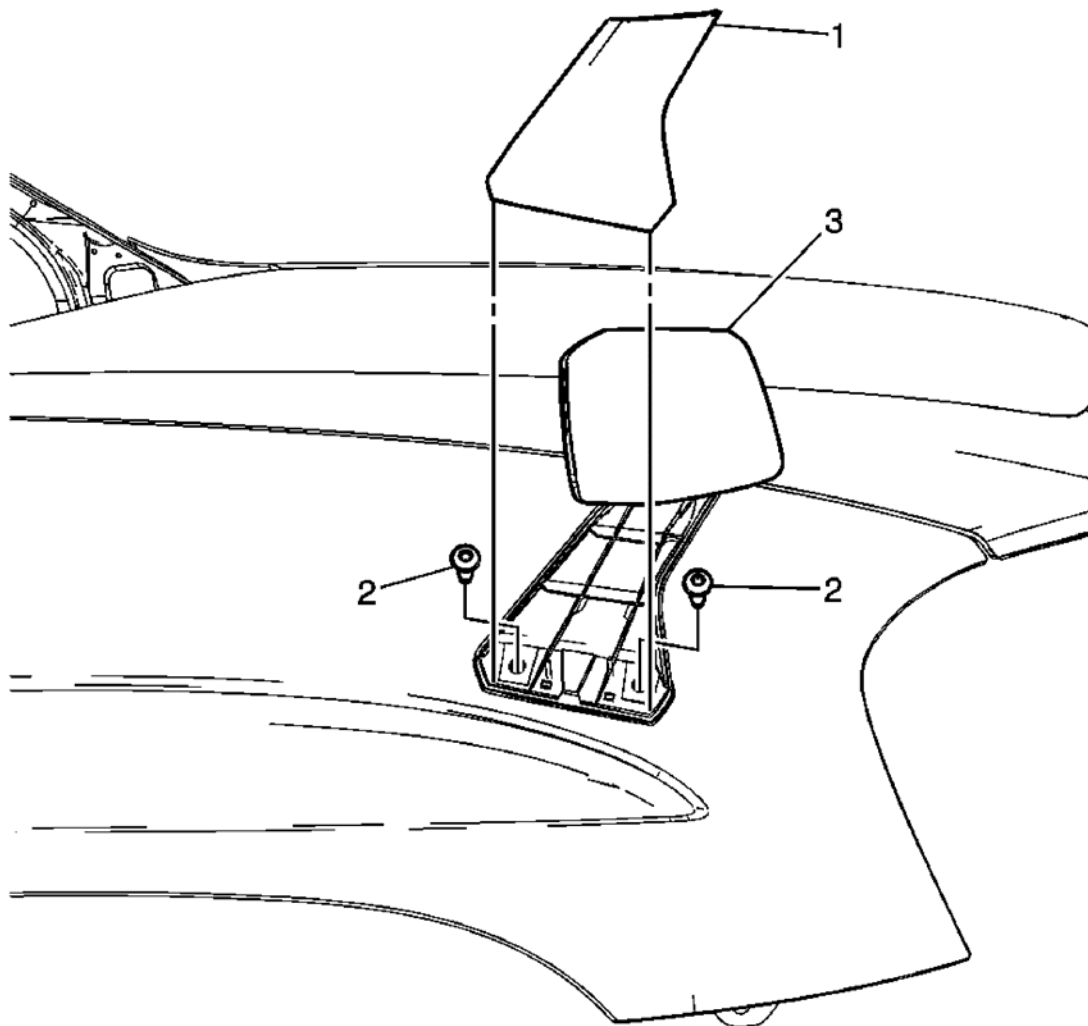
View Of Outside Rearview Mirror, Cover & Screws
